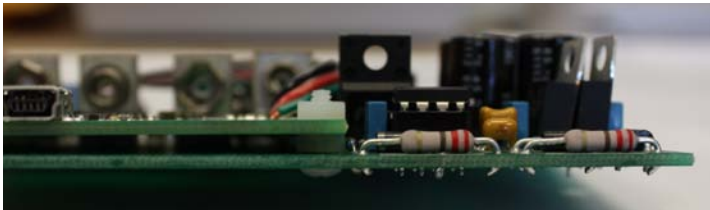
Side view of completed O2+ODAC Combo (step 6)
